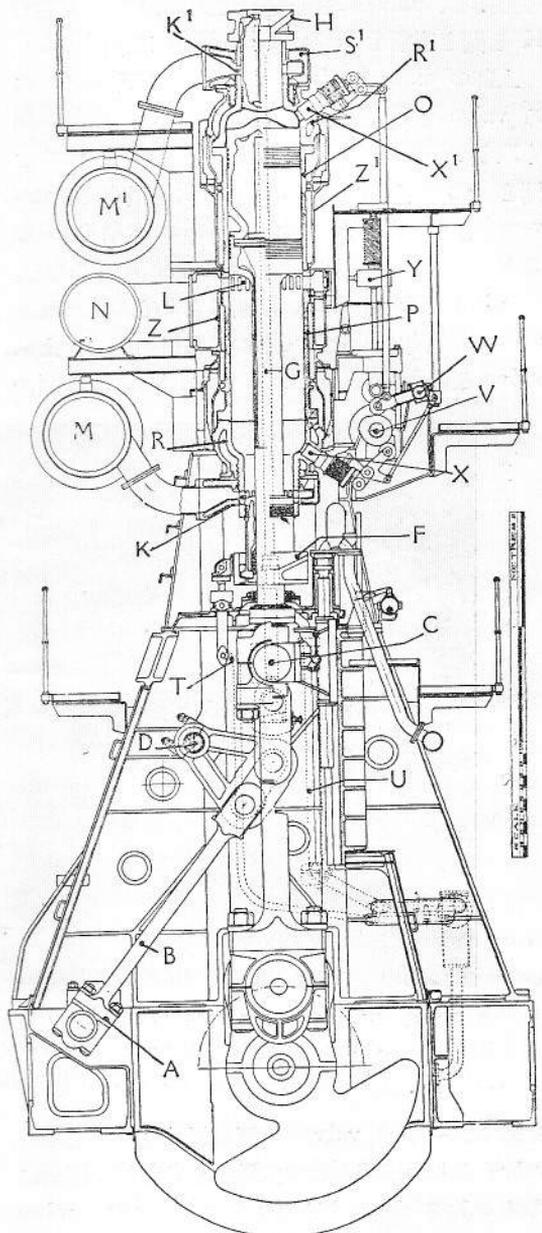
Sectional elevation of one cylinder of 6,000 b.h.p. B. and W. double-acting engine.
